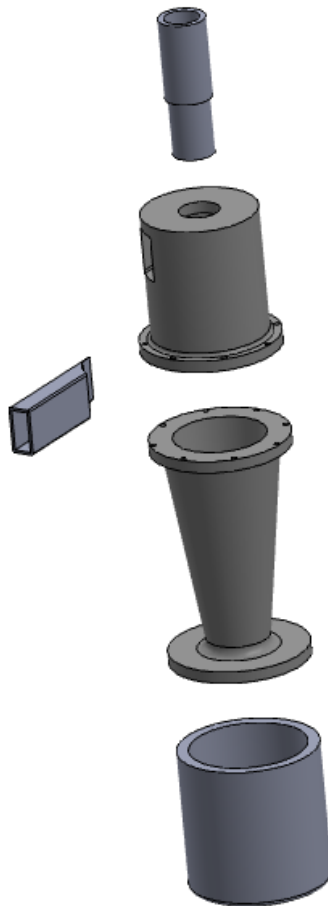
Second Iteration of Cyclone Manufacture Drawings
